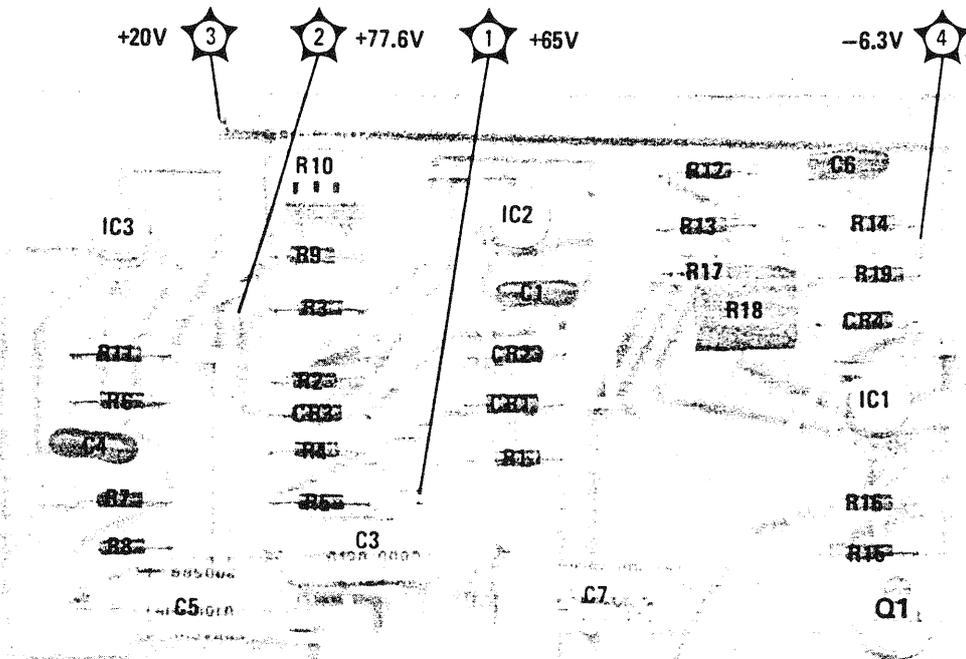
Component Identification, Assembly A14 (Part of Change 2)
